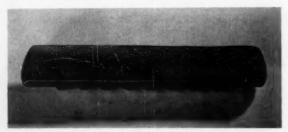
Cope side of rack casting showing typical orange peel defect. Surface roughness and depressed areas characterize the defect.
